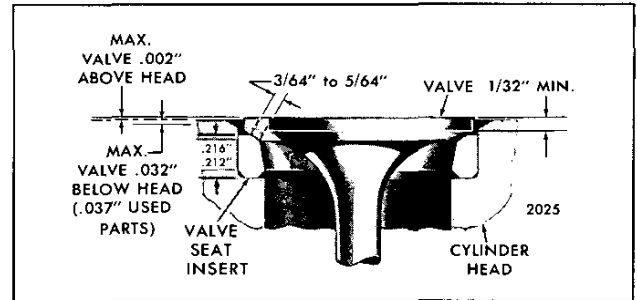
Relationship Between Exhaust Valve, Insert and Cylinder Head (Two-Valve Head)
